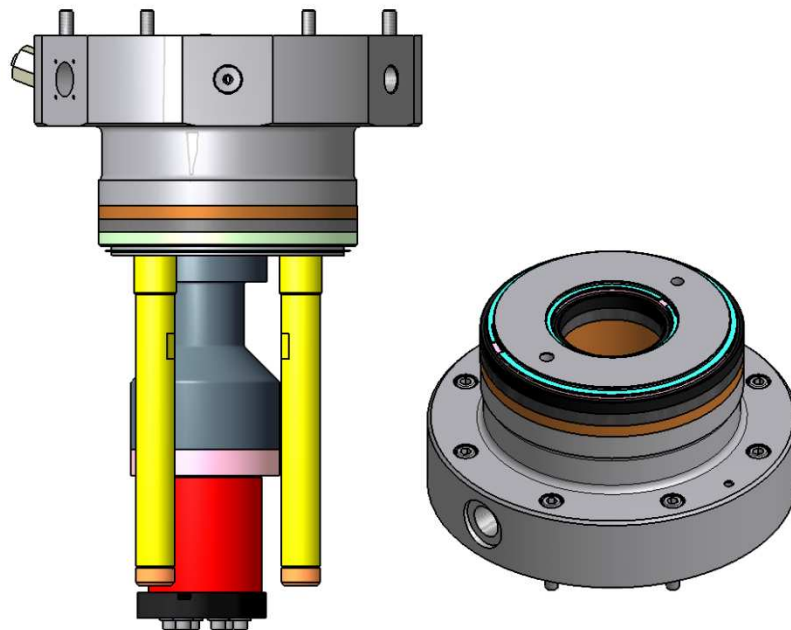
CAD Model of Upper Plug (left) and Lower Plug (right)
